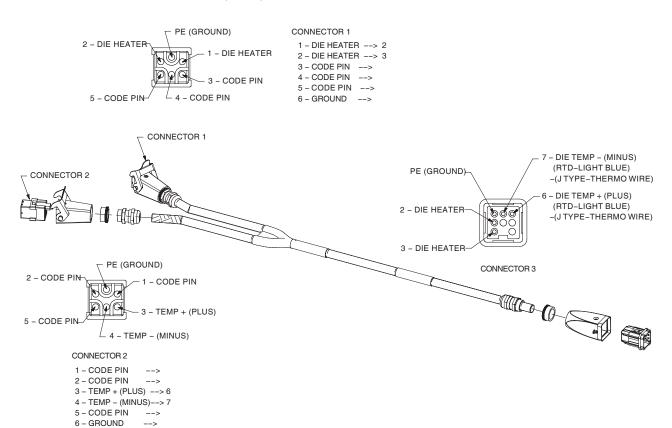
M-style splitter cable cordset pin positions (applicator adhesive cordset to adhesive extension cables)
